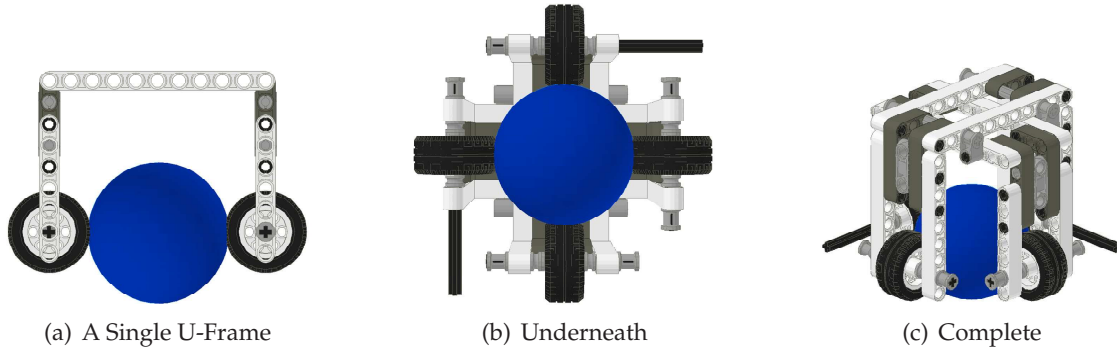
Lego Ballbot: The Frame for the Drive Mechanism
